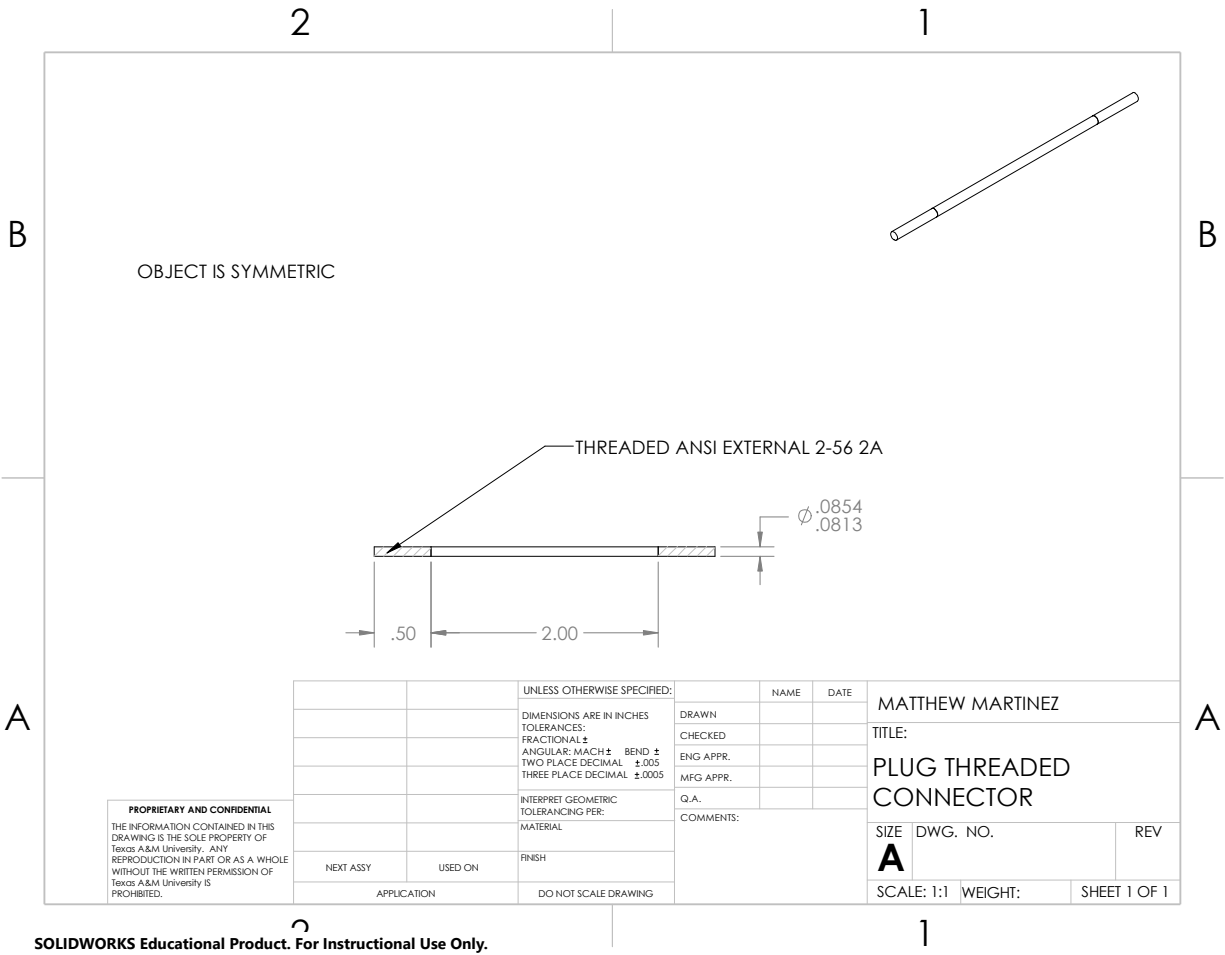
Dimensioned drawing of the Plug threaded connectors
